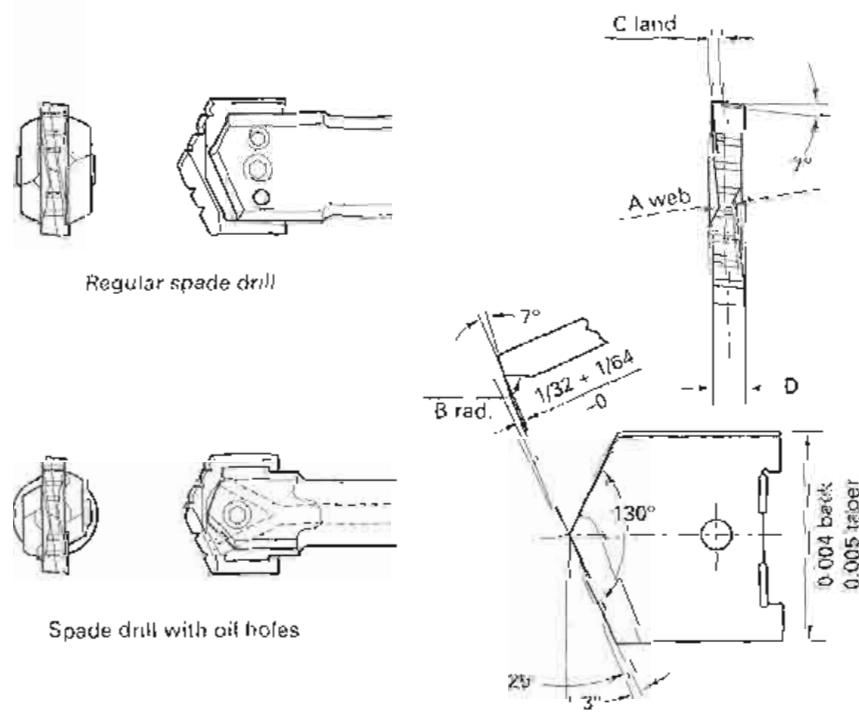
(Top) Regular spade drill; (middle) spade drill with oil holes; (bottom) spade drill geometry, nomenclature
